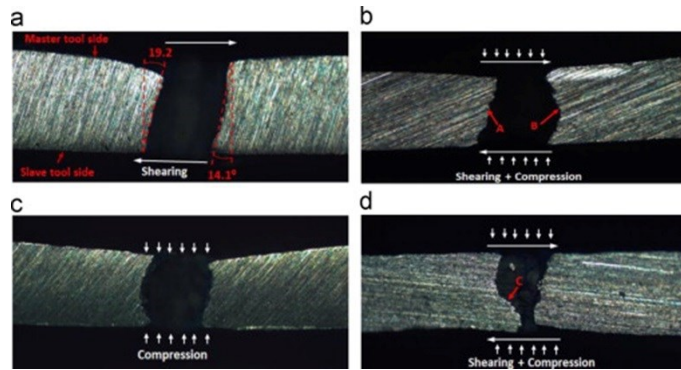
Material deformation in tangential cross-section of the hole: a) 240 N without tool shift, b) 240 N with tool shift, c) 480 N without tool shift, d) 480 N with tool shift [168].
